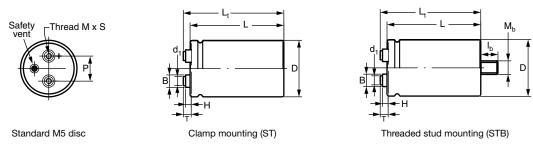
A - Mechanical drawings for standard M5 disc versions. For details refer to Table 1
